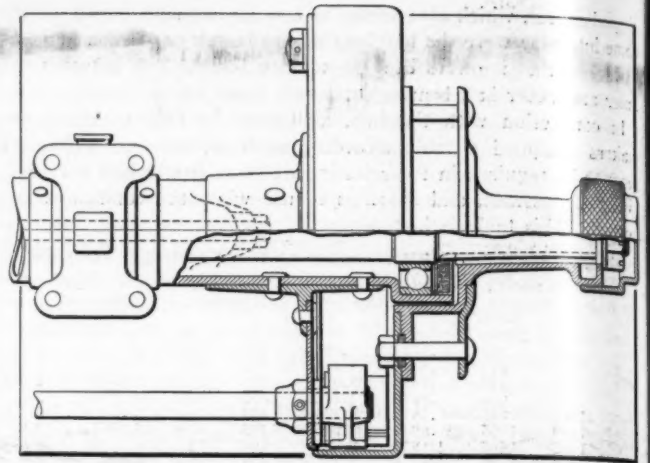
Hub end of a live rear axle, showing drawn steel brake drum attached to hub flange
